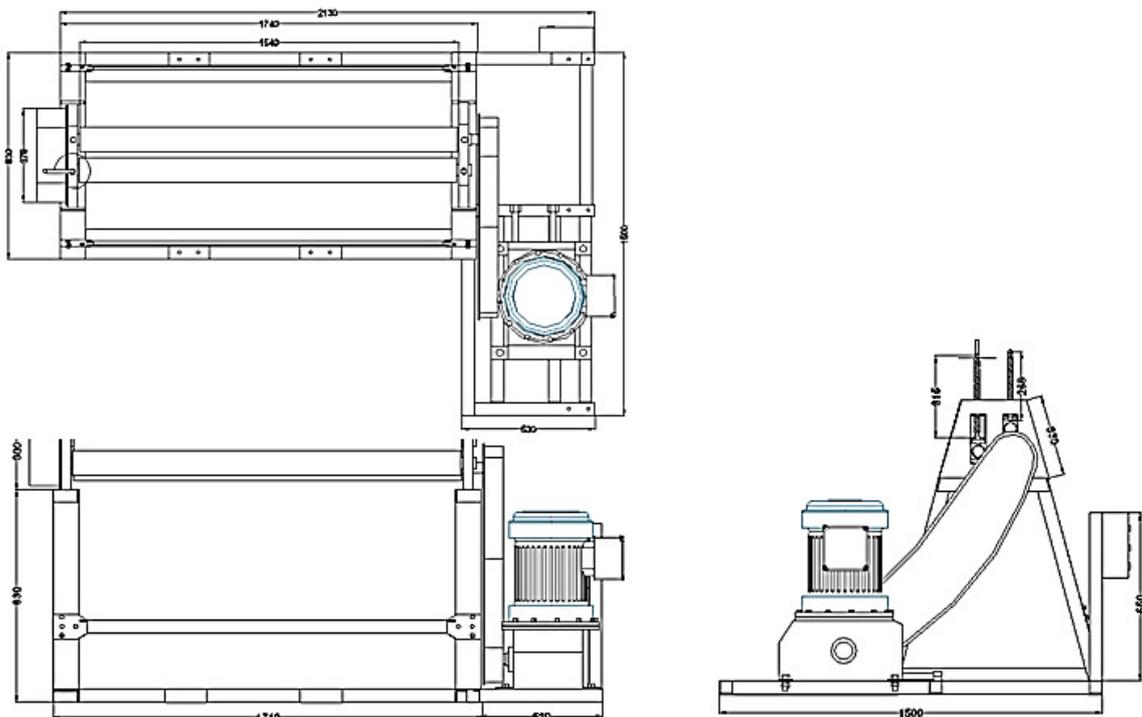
Orthographic projections of the 3-rolls plate bending machine
